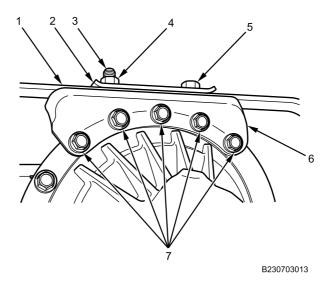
Transmission Mounting Crossmember Spring And Transmission Rear Mount Bracket.
